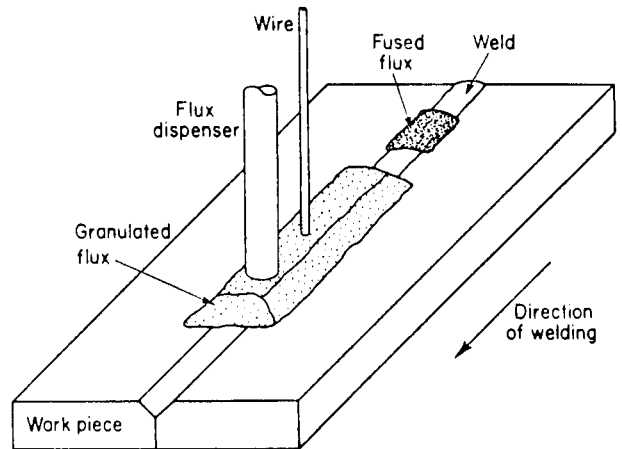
Submerged arc welding (SAW) (8).
